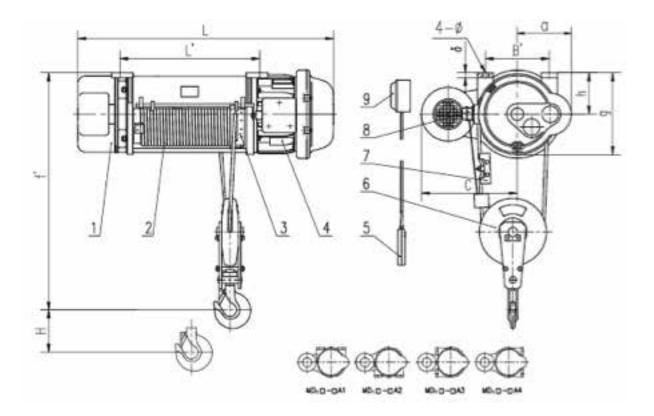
Outline Structure Drawing for PWMDF3T24M and PWMDF5T24M Fixed Hoist
